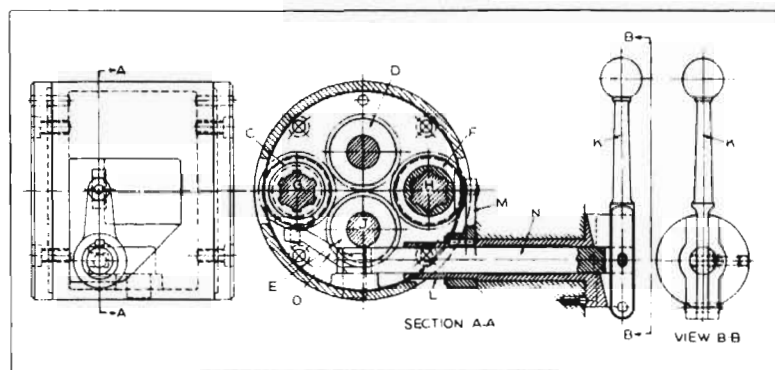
Compact gear-box provides single-lever selection of eight directional output combinations of shafts *G* and *H* from a unidirectional input shaft *J*.
